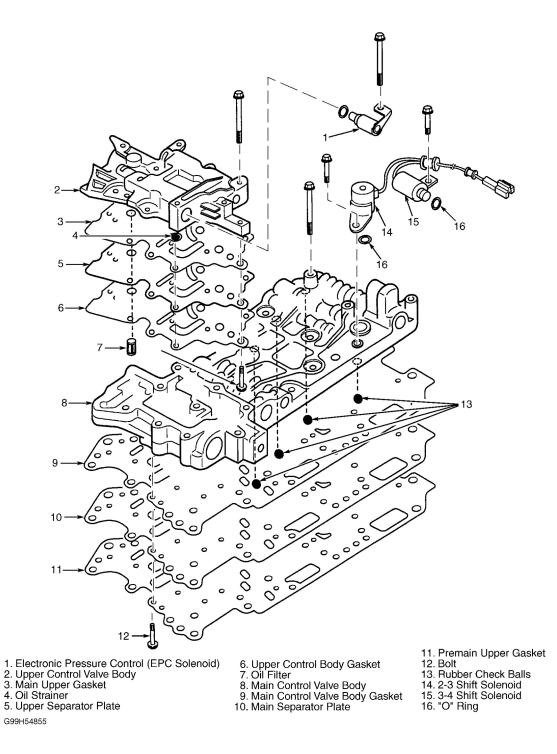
Exploded View Of Main & Upper Valve Bodies Courtesy of FORD MOTOR CO.
